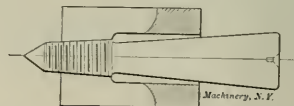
Spring Screw Die Mounted on Threaded Arbor for Grinding.
